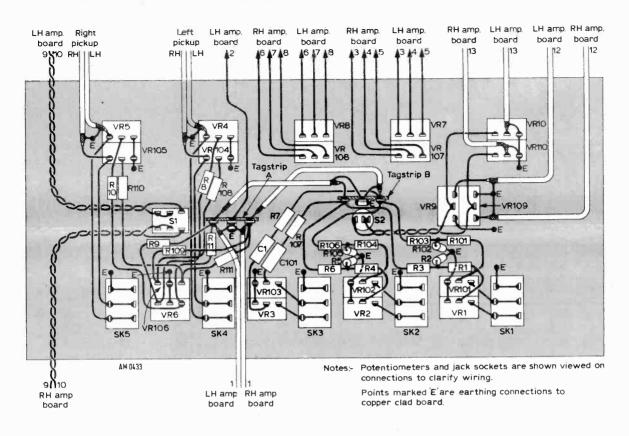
Construction of the mixer, made from double-sided copper board, one of the sides being used as a common earth plane.
